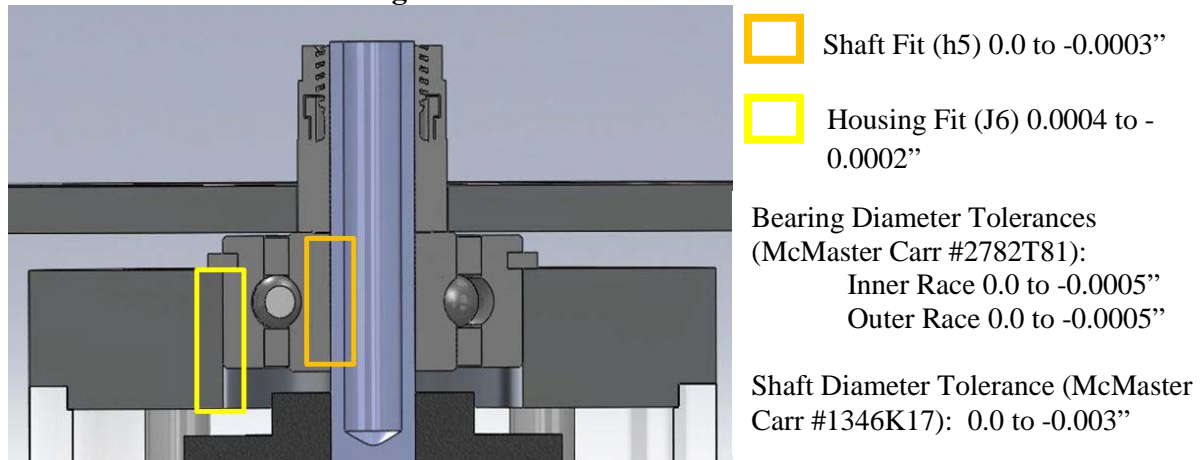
Pendulum Arm Bearing Block Tolerances
